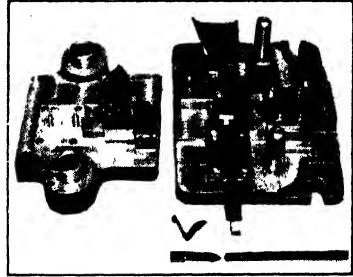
The tool used in the press in Fig. 332 to pierce, bend and part, push over and finish bend at about 200 SPM.
